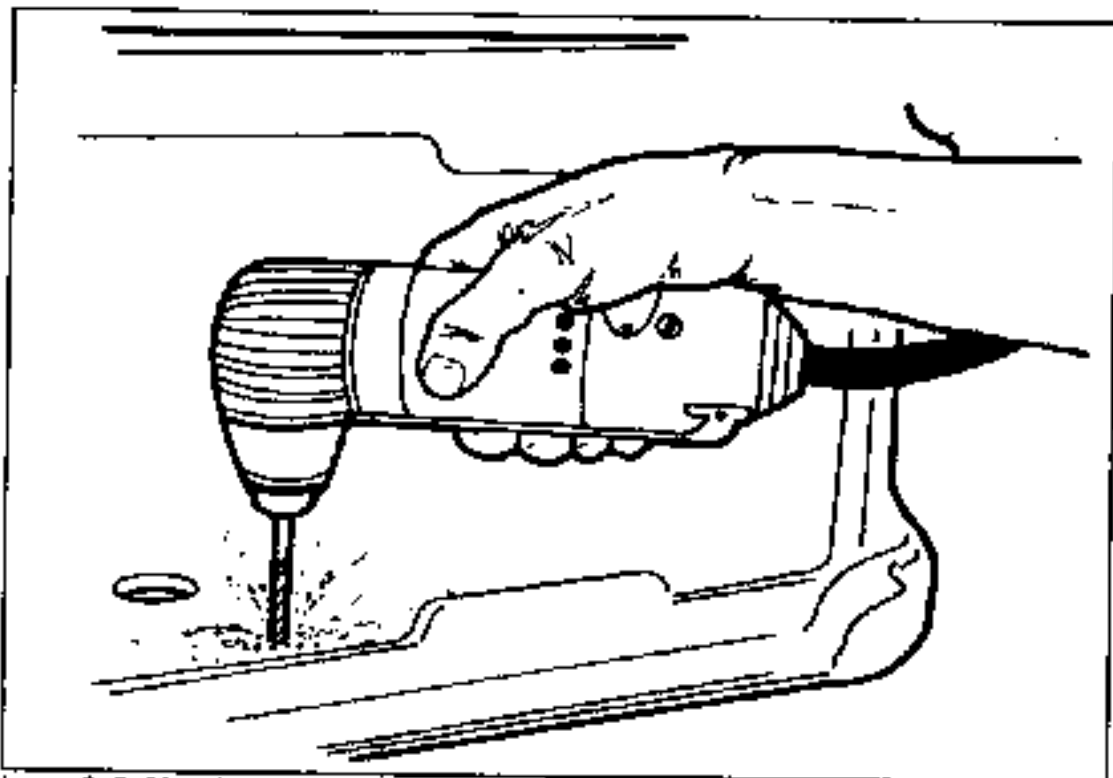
Hand drilling operation in confined space using the 90° angle drill.
